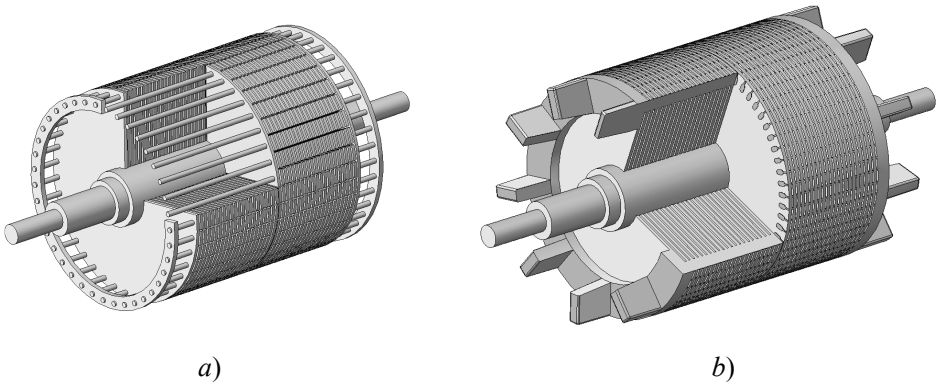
Rotors of asynchronous motors with welded (a) and casted (b) cages
